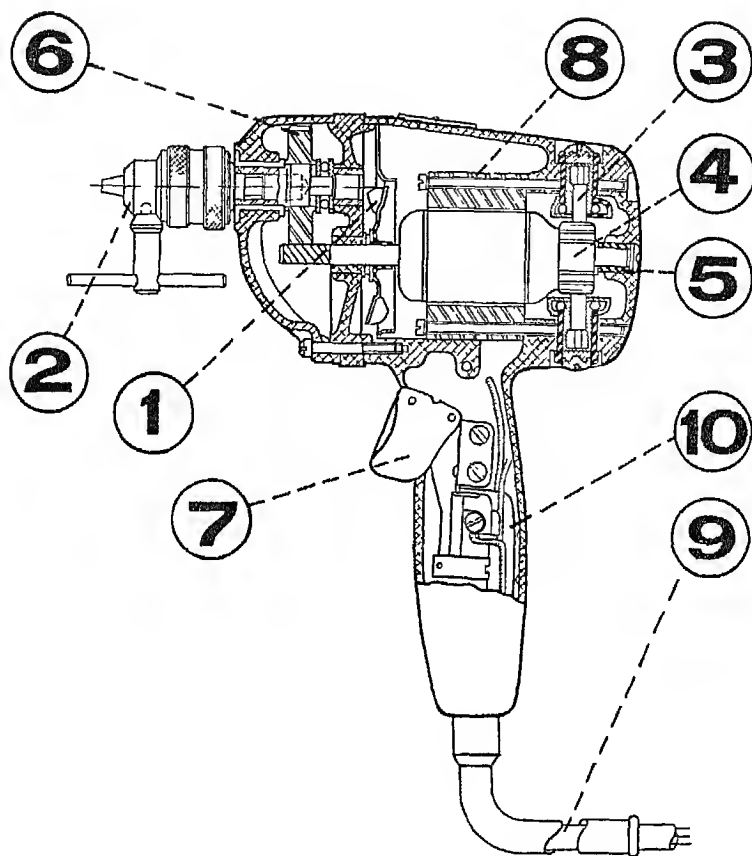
The Black and Decker D500 Drill—main parts.* 1. Armature fan. 2. Quarter-inch geared chuck and key. 3. Brush Assembly. 4. Armature and fan. 5. Sleeve bearing. 6. Spindle and gear. 7. Pressure switch. 8. Field assembly. 9. Cable. 10. Switch insulating box handle and cover.
